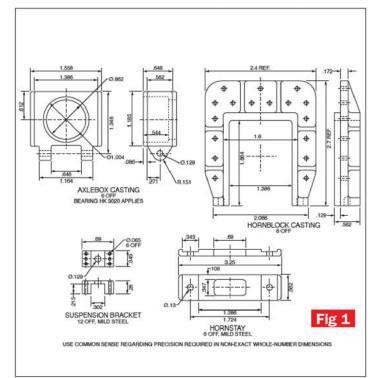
7¹/₄in. gauge Knotty axlebox and hornblock drawing.
